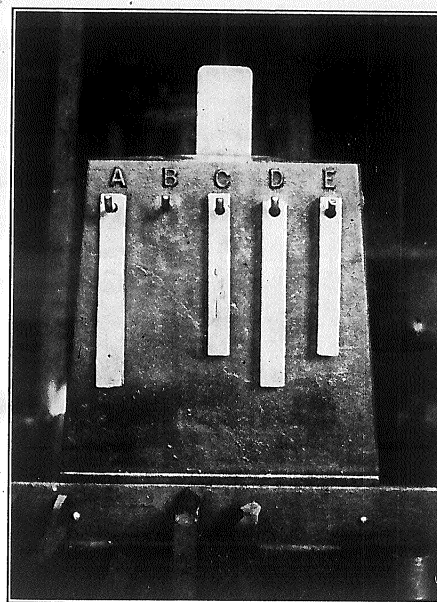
Height Gauge and Standard Packing Pieces, for facilitating the setting of lathe tools in tool post. (The graduations on the gauge indicating packing pieces to be used do not show clearly.)
